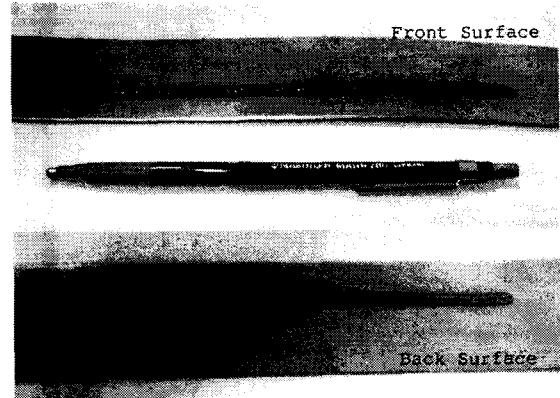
Weld Bead/ Burn Pattern for Robot Control
